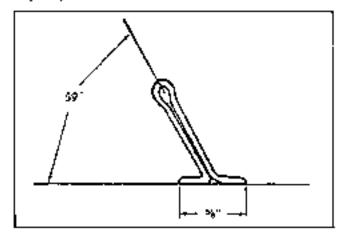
Total For Removing Upper Holf of Motin Bearing
